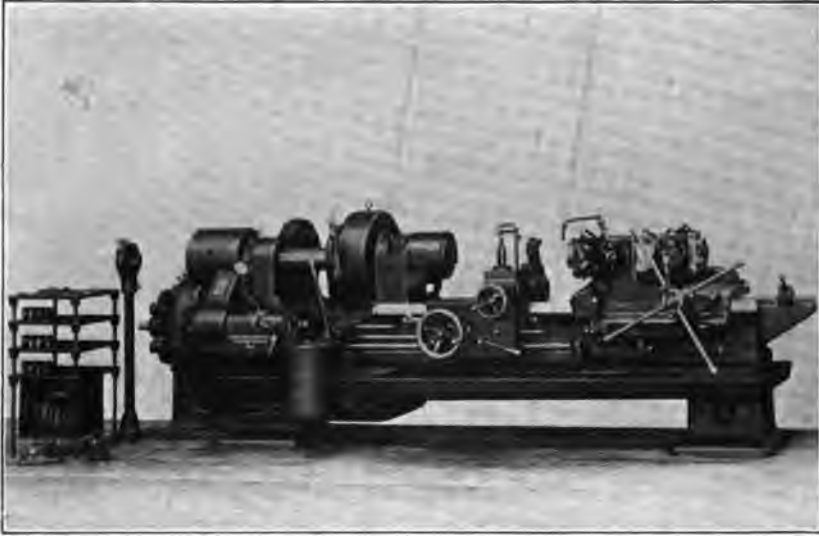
Warner & Swasey hexagon turret lathe. Head and bed cast in one piece; direct connected motor drive; flat turret carriage.
